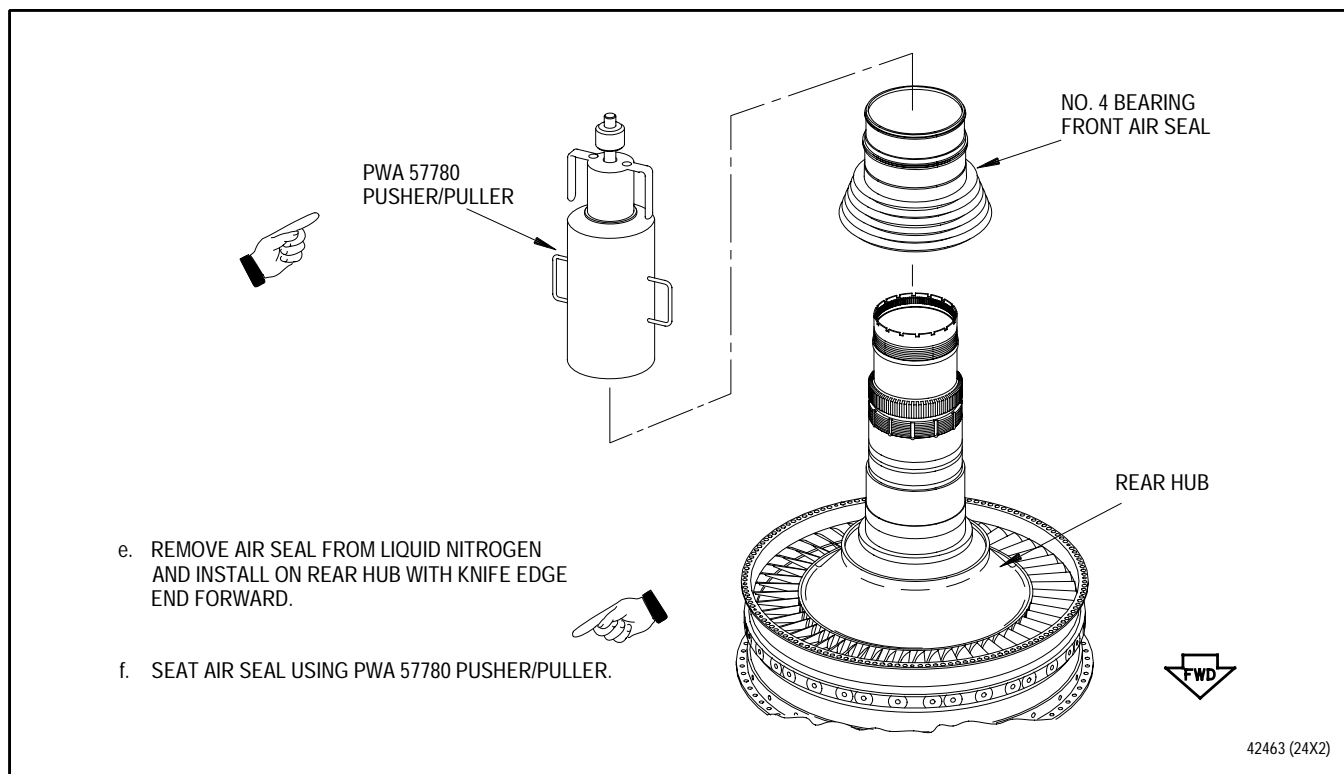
A. No. 4 Bearing Front Air Seal - Installation (Sheet 2 of 4)
